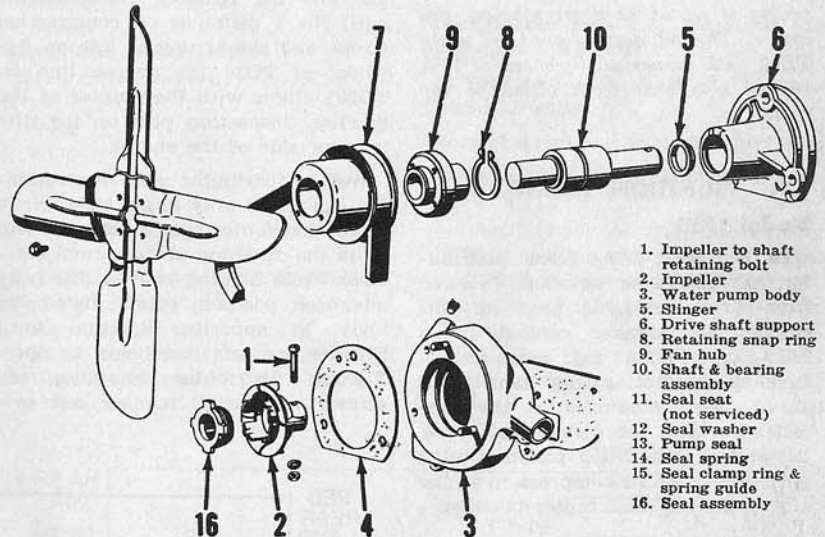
A—Water pump—exploded view. Seal assembly (16) consists of a carbon washer, rubber bellows, reinforcing ring and spring.
